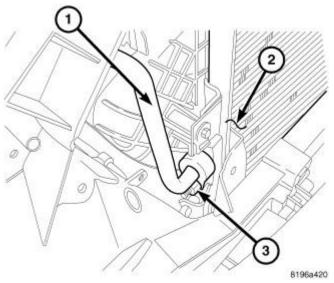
A/C Line, Condenser & Nut Courtesy of CHRYSLER LLC
